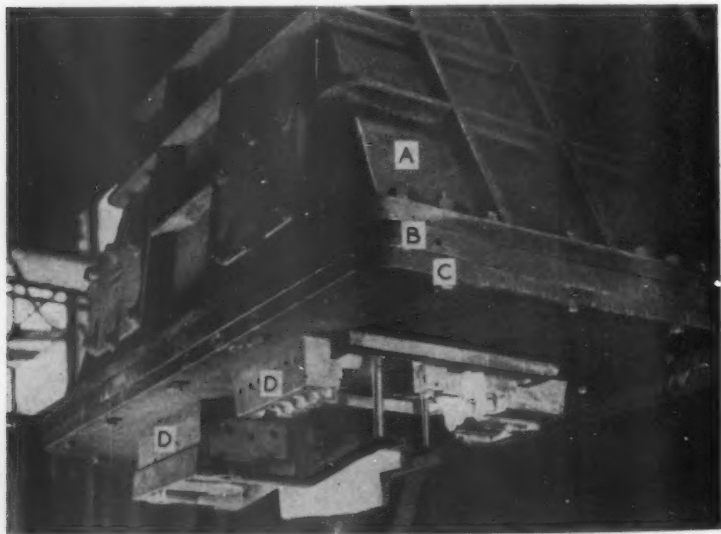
SHOWING ASSEMBLED BOXES ON CORE BLOWER. (A) MAGAZINE, (B) MAGAZINE PLATE, (C) BLOW PLATE, (D) UPPER HALVES OF CORE BOXES. THE LOWER HALVES OF THE CORE BOXES ARE MOUNTED ON MACHINE TABLE DIRECTLY UNDERNEATH UPPER HALVES.
